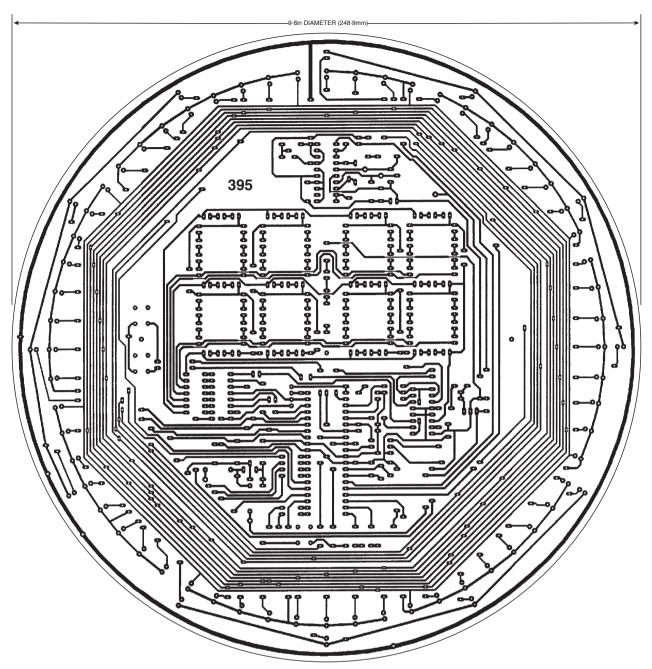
Reduced scale copper foil track pattern for the PICronos L.E.D. Wall Clock. This should be enlarged on a photocopier to 9.8in. x 9.8in. (248.5mm x 248.5mm) or purchase a board from the EPE PCB Service.
